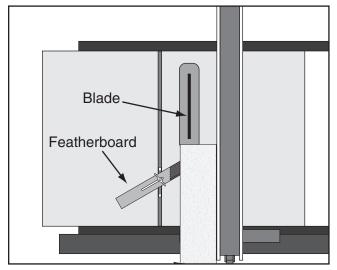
Featherboard installed in miter slot and supporting workpiece for ripping cut.
